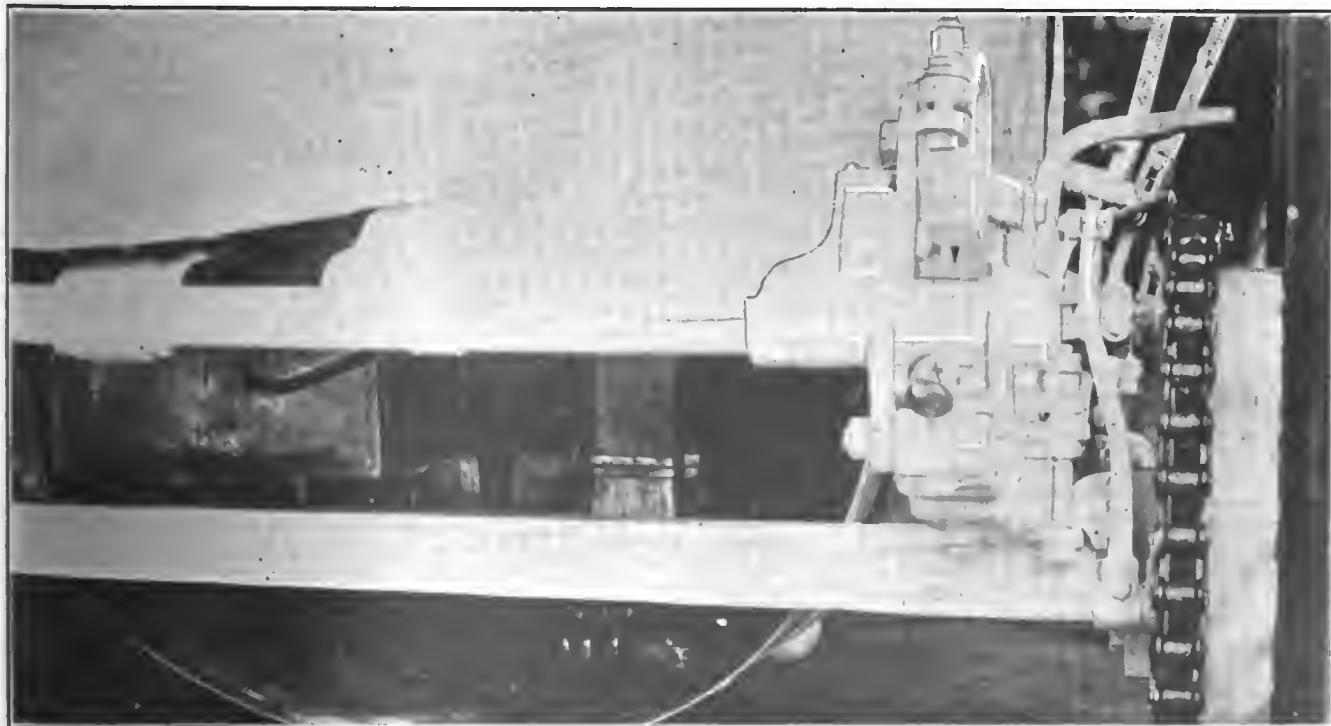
Rear axle of the same car, showing I-section forging, shock absorber, spring suspension, and chain drive
